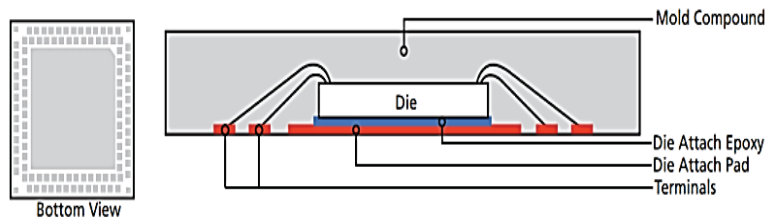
Bottom View and Cross Section of Dual-Row QFN Package [11]
